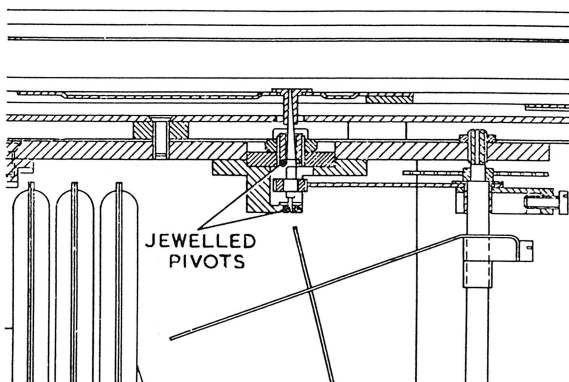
Pointer pinion assembly Mk. 1B (Mechanism Ltd.)
